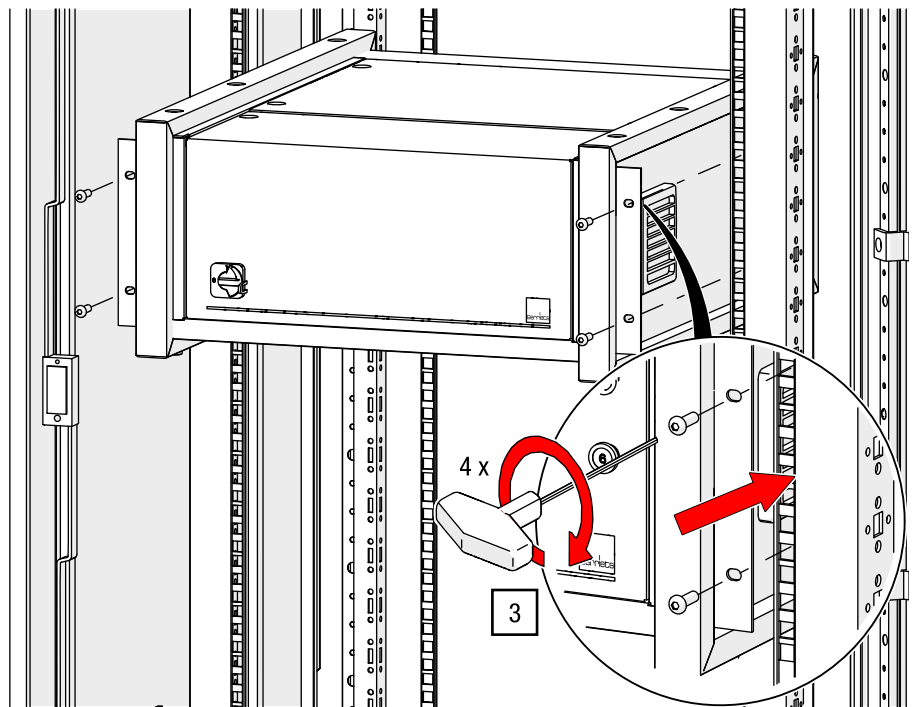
Screwing the G-FRAME into the rack (control unit model may differ)
